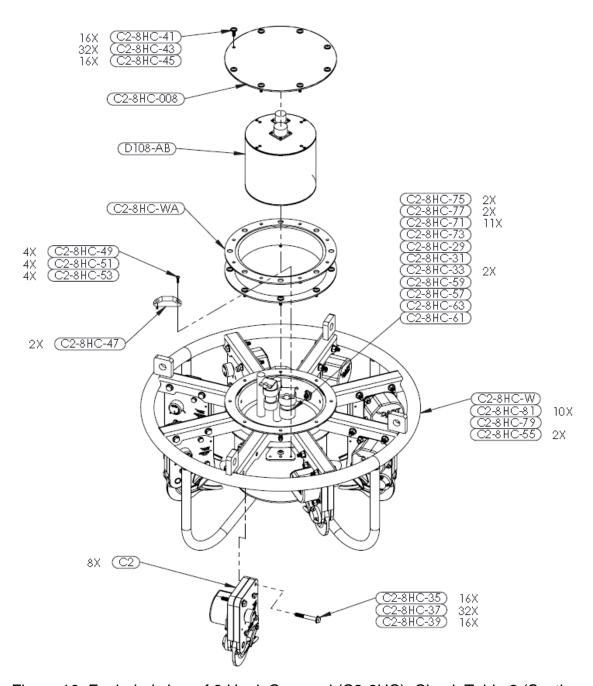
Exploded view of 8 Hook Carousel (C2-8HC). Check Table 2 (Section 8.1) for the assembly component differences between the 4 Hook, 6 Hook, and 8 Hook Carousels.
